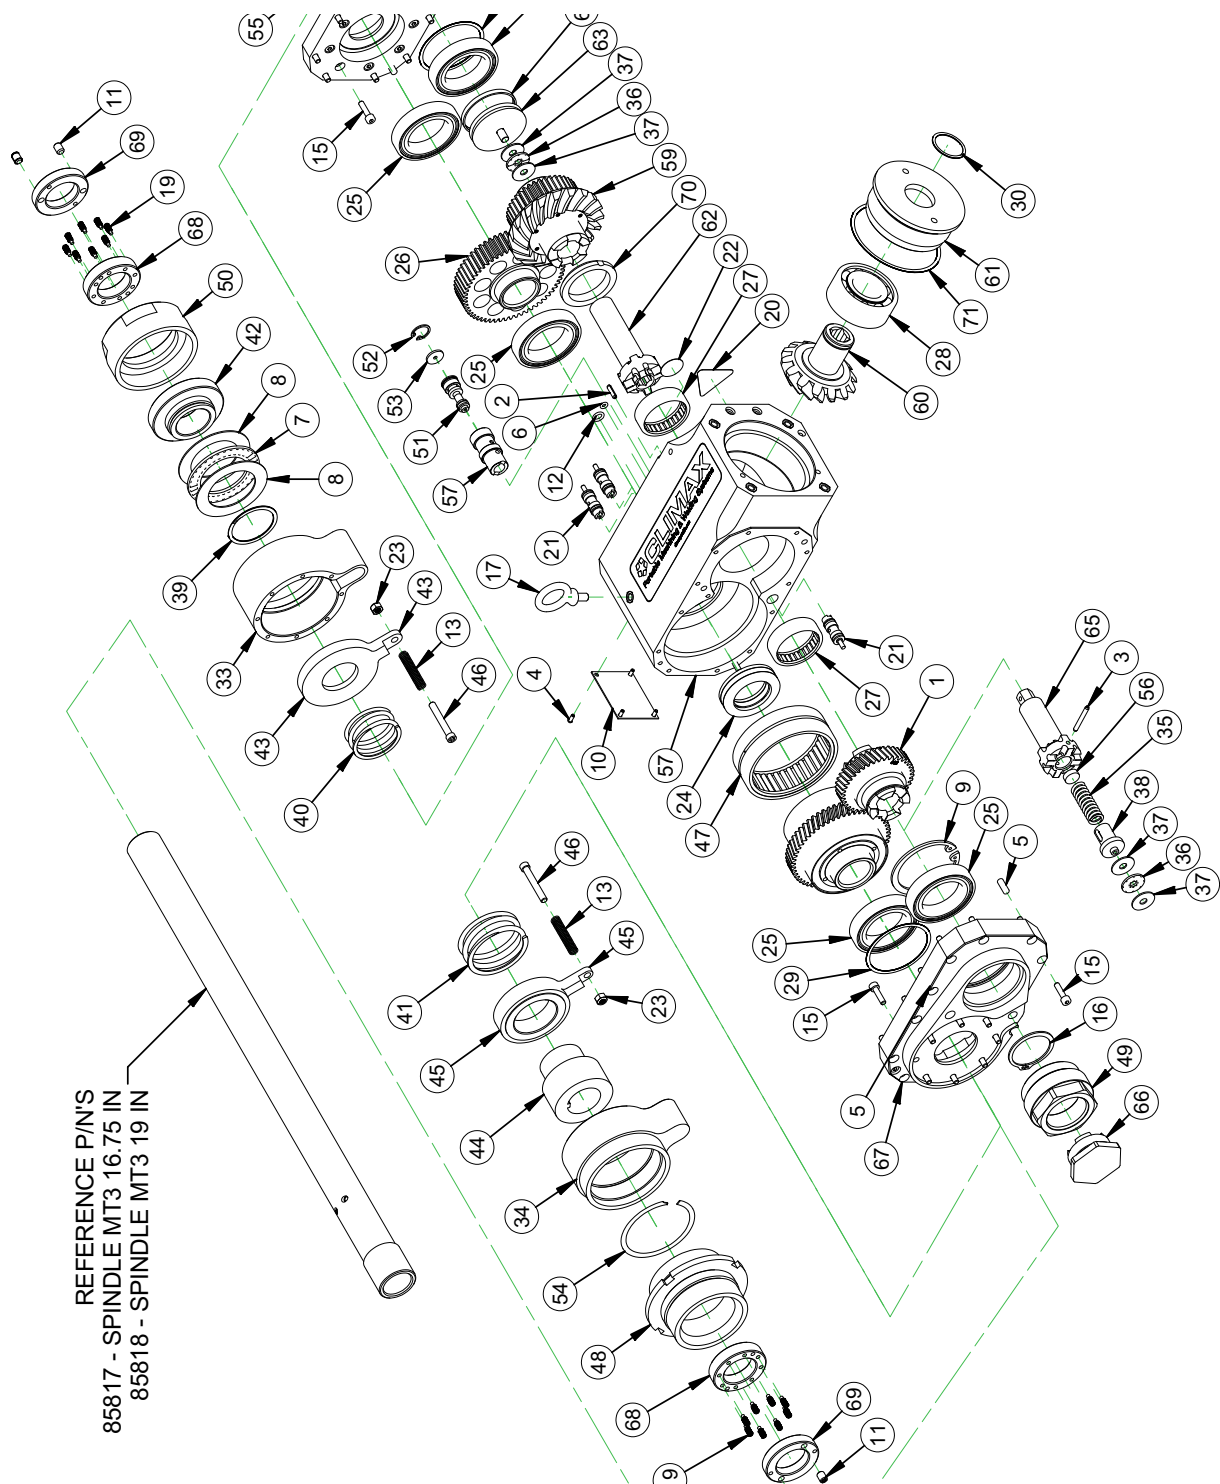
P/N 85590 PD3000 RIGHT ANGLE GEARBOX ASSEMBLY
